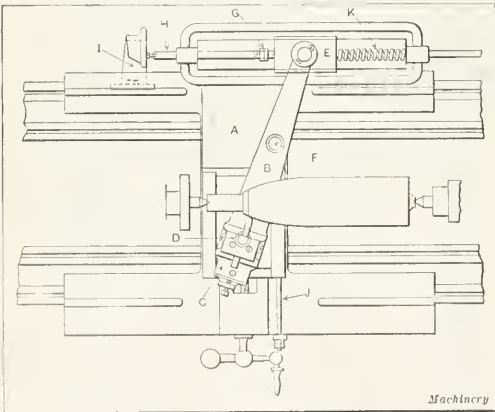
Shell Turning Attachment with Tool turning Nose of Shell
